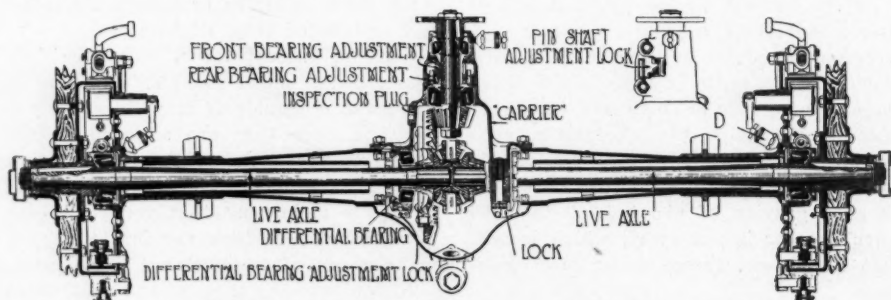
SECTION OF HUDSON REAR AXLE SHOWING THE ADJUSTMENTS
